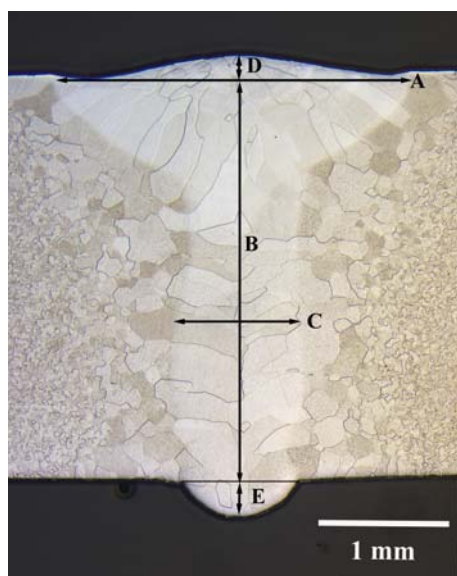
Sample weld cross-section macro showing locations where weld measurements are made. A Weld Width; B Weld Depth; C Keyhole Width; D Weld Reinforcement Height; E Underbead Height. The weld shown in the figure is made in commercially pure vanadium.
